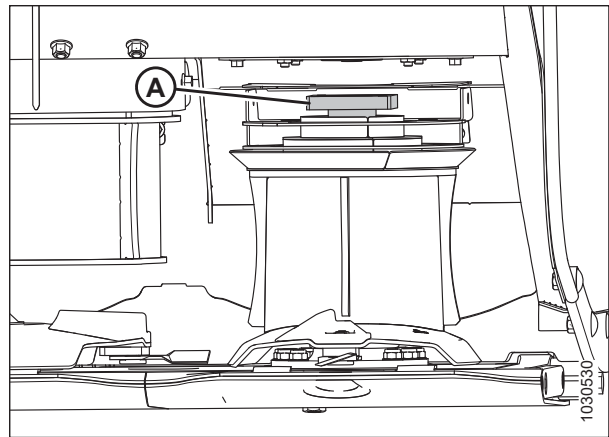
Left Driven Drum – Spindle Spline Dismounted
